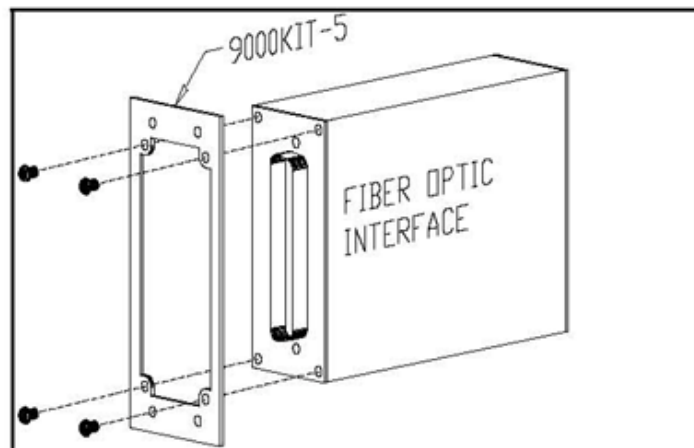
SYSTEM 9000 CHASSIS MOUNT
